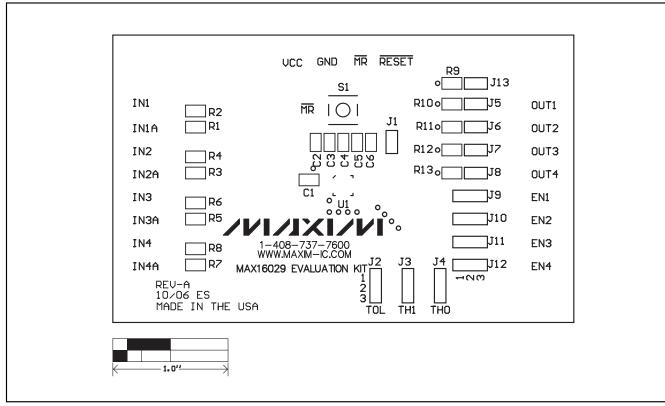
MAX16029EV Kit Component Placement Guide—Components Side
